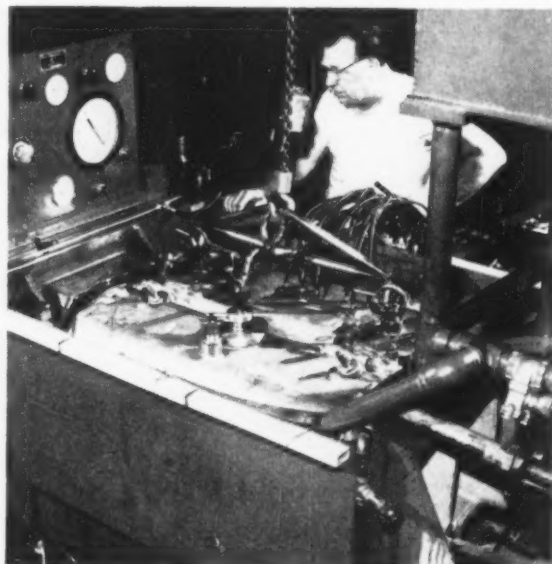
Special Beach machine is designed to clamp and apply air pressure inside a machined housing, to help locate casting leaks.
